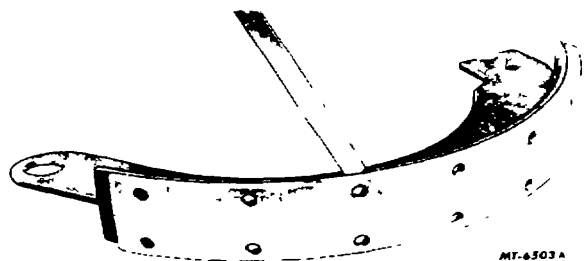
Checking Tightness of Lining Using A Feeler Gauge
